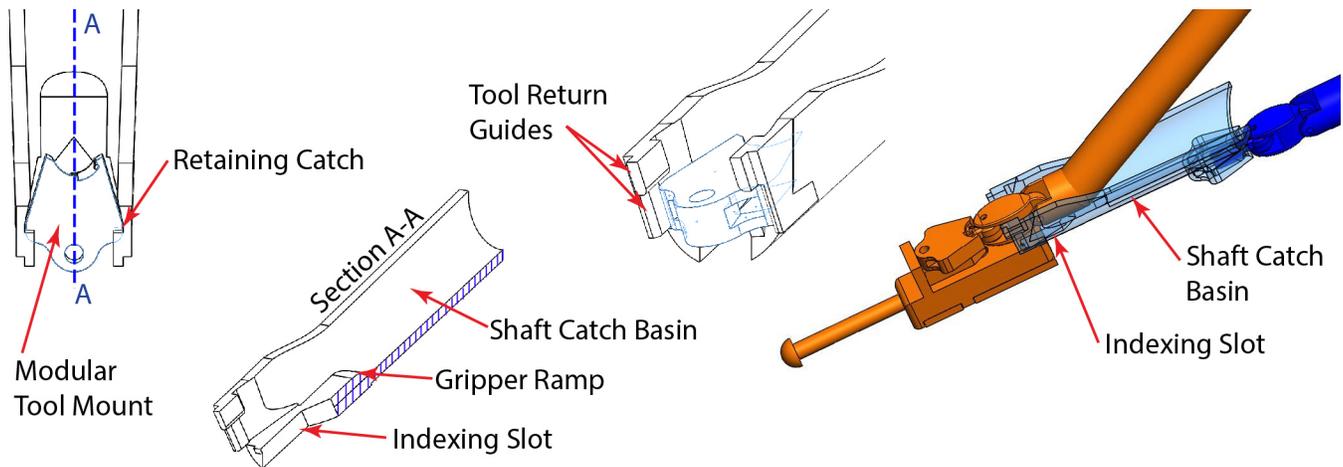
Changing tools within the body cavity could reduce surgical time. In this configuration the blue arm carries a new tool into the surgical workspace, the orange arm interfaces with the tool and carries it to the point of use.
